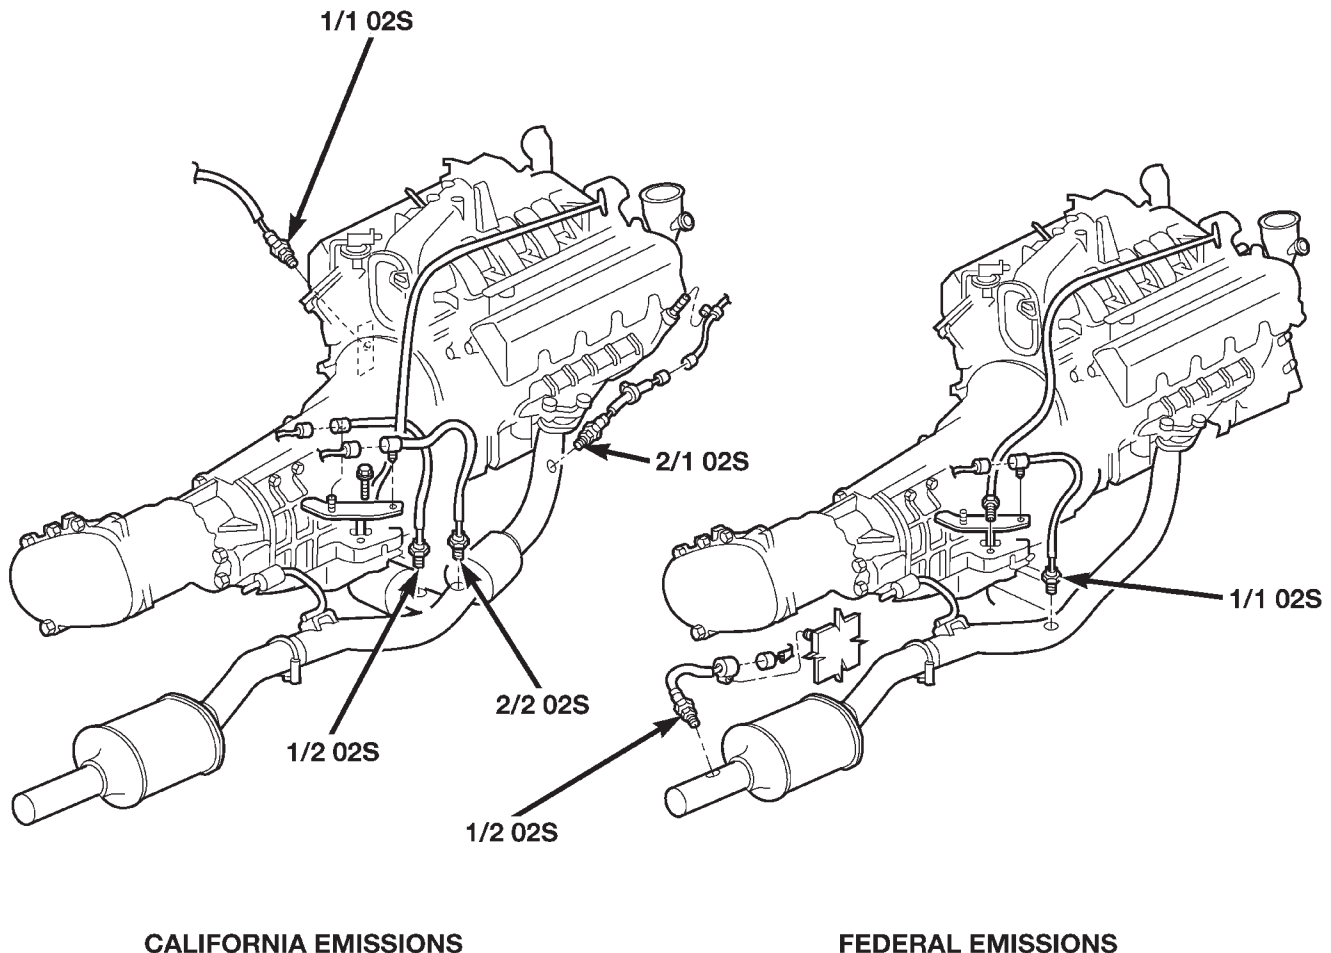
Oxygen Sensor Locations—4.7L V-8 Engine
